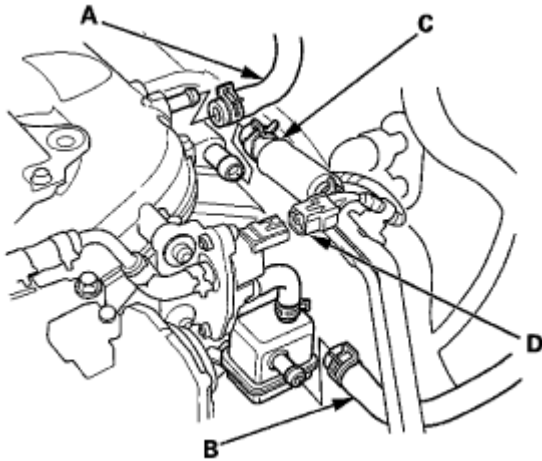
Identifying Brake Booster Vacuum Hose, EVAP Canister Hose And Breather Hose
